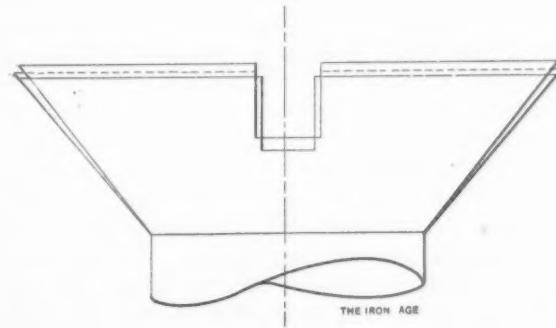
Showing the Present Variation and Proposed Design for Flat Head Machine Screws.
